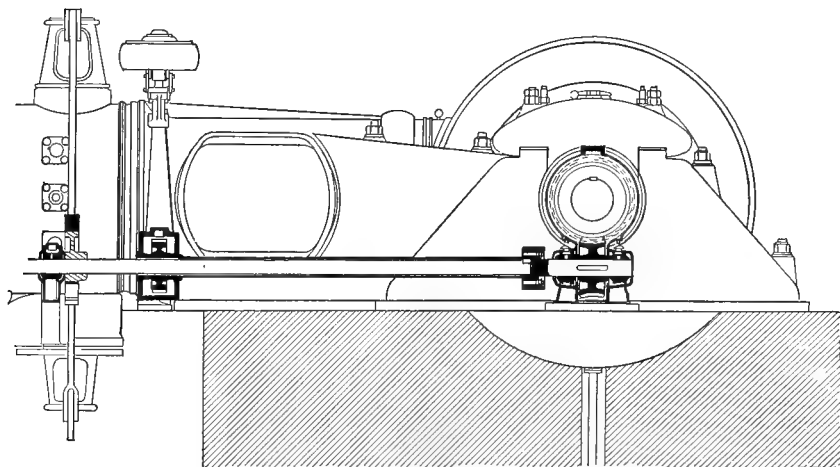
Driving Governor by Separate Tube Concentric to the Cam Shaft.
